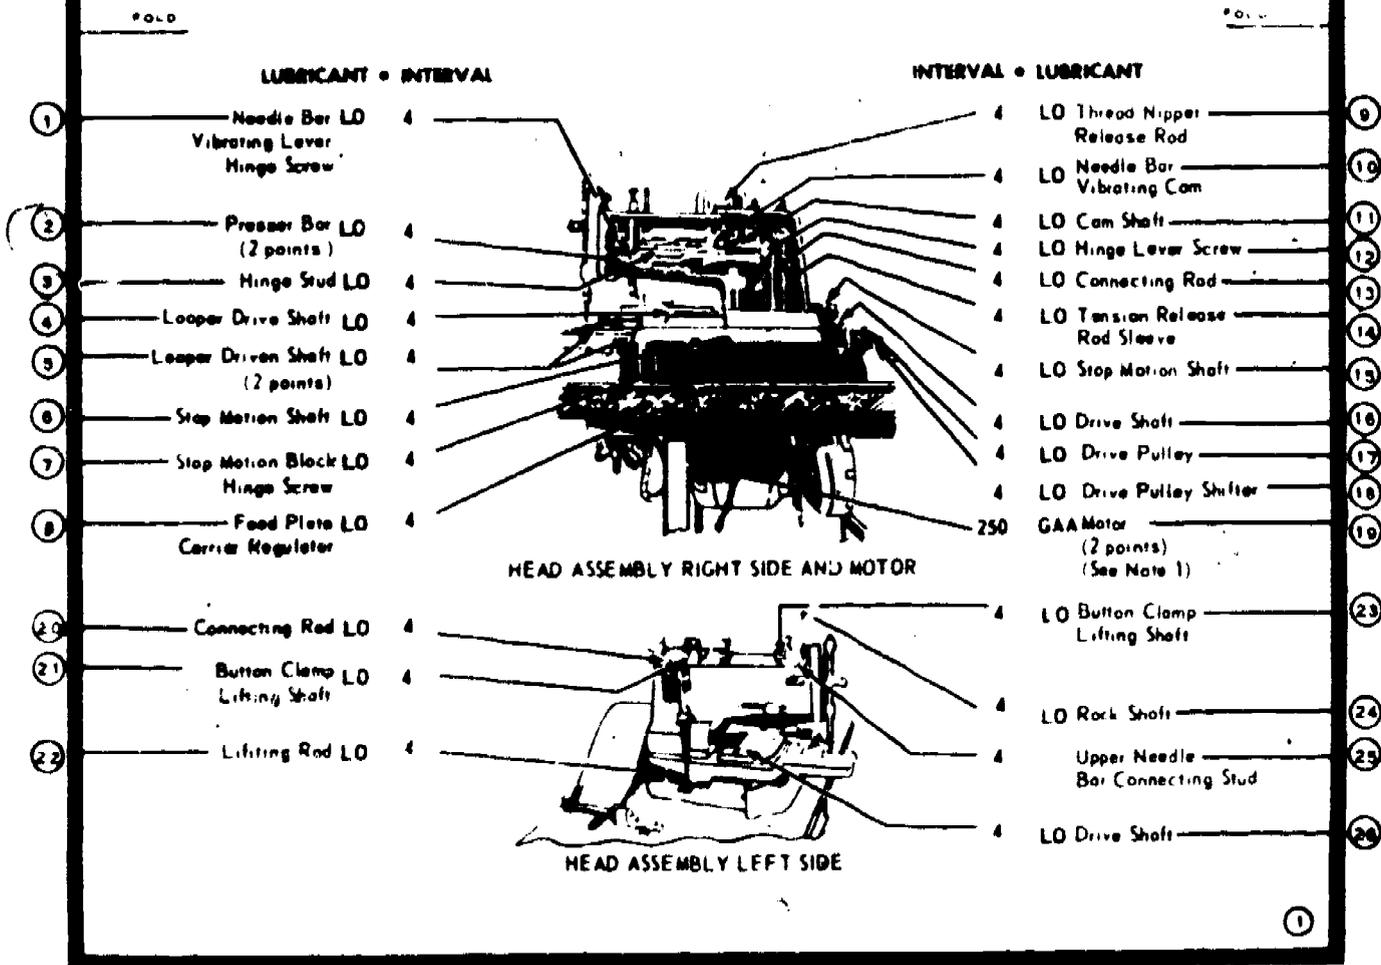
Lubrication Order 10-3530-203-10-1 for button sewing machine.
